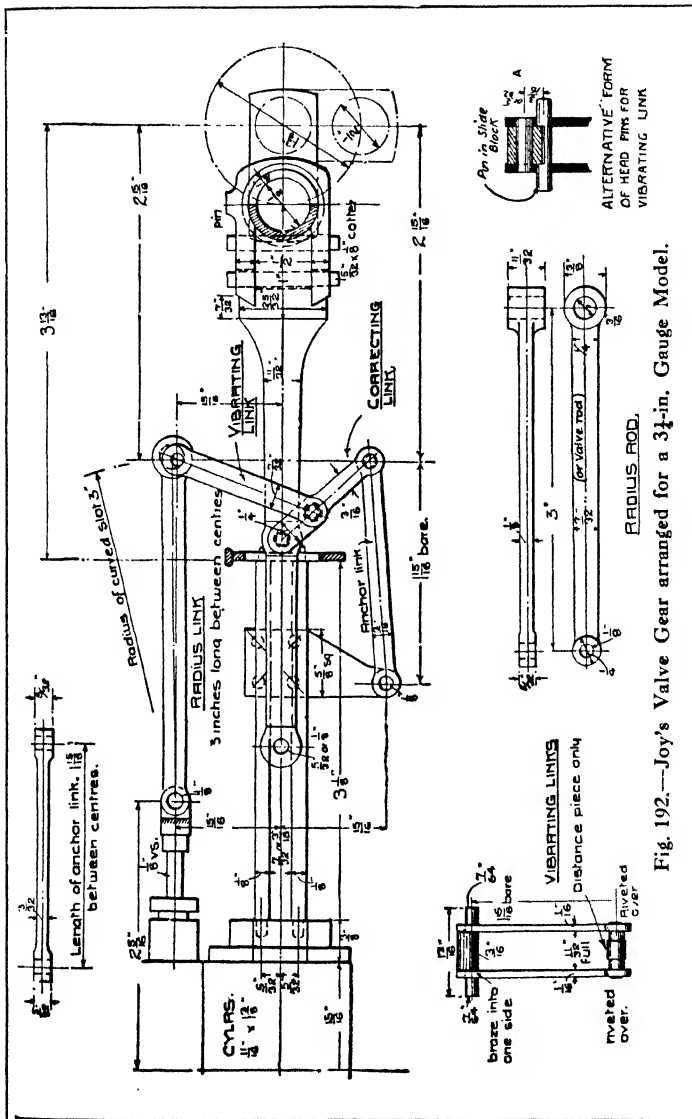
Joy's Valve Gear arranged for a 3 1/4-in. Gauge Model.
